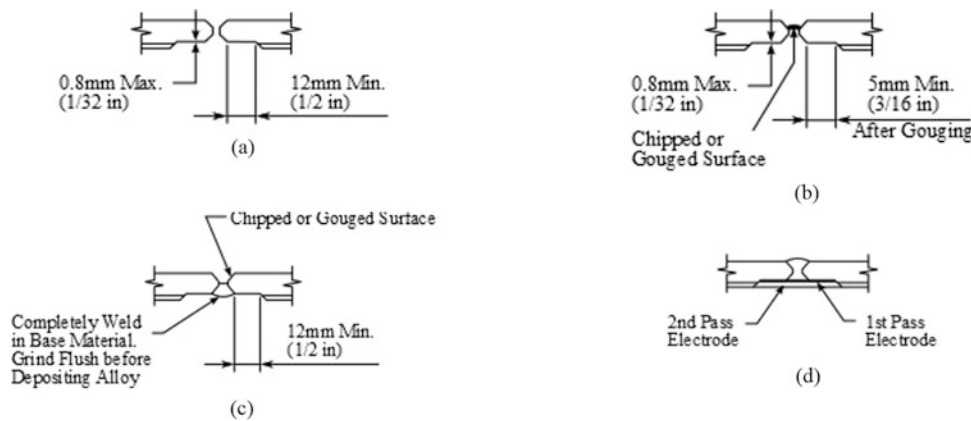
Backfilling on stainless steels or nickel alloy cladding in butt joint. (a) Machining. (b) Root pass*. (c) Main fill & back-gouge*. (d) Backfill & cladding. *The minimum distance (5 mm) between the end of the bevel/gouged and the end of clad at cutback to be kept to avoid alloy contamination, so that large diameter gouging stick should be carefully selected before gouging
